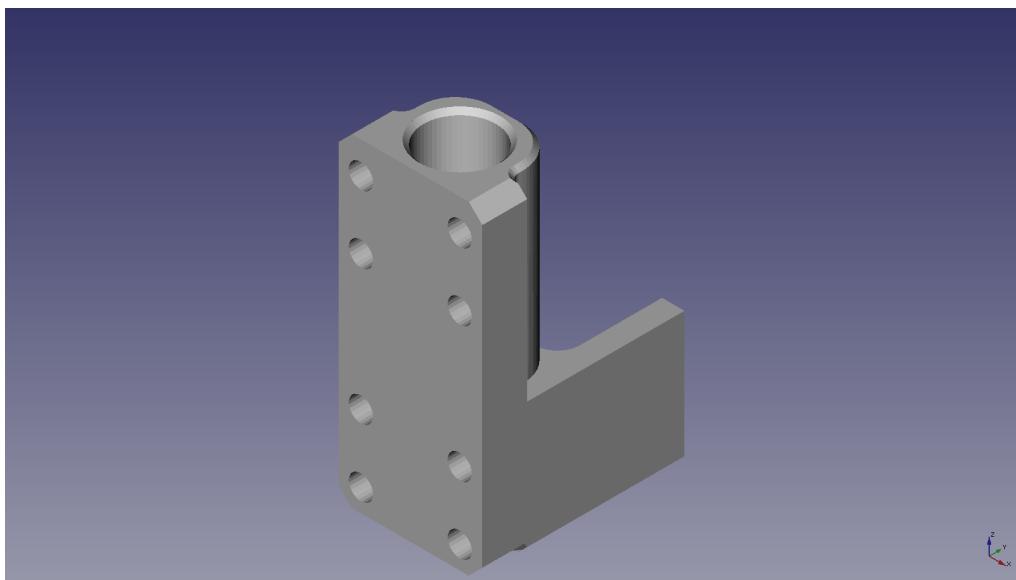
Begonia 3D Printed Extruder Mt Top Double Bearing Holder Render
